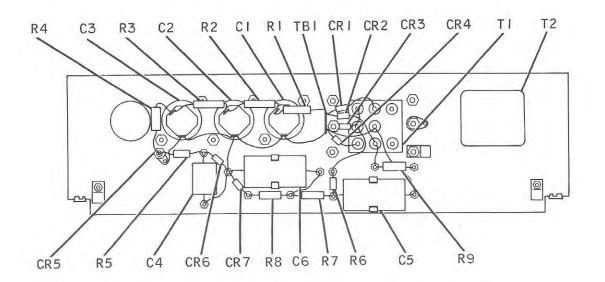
Printed Circuit Board (Sheet 3 of 3).
